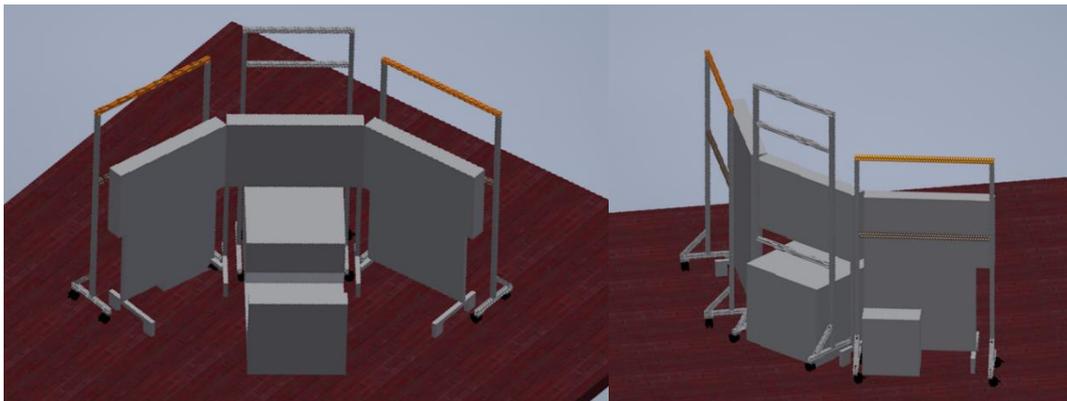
Dimension/fit analysis of the frames: front view (left); rear view (right).
